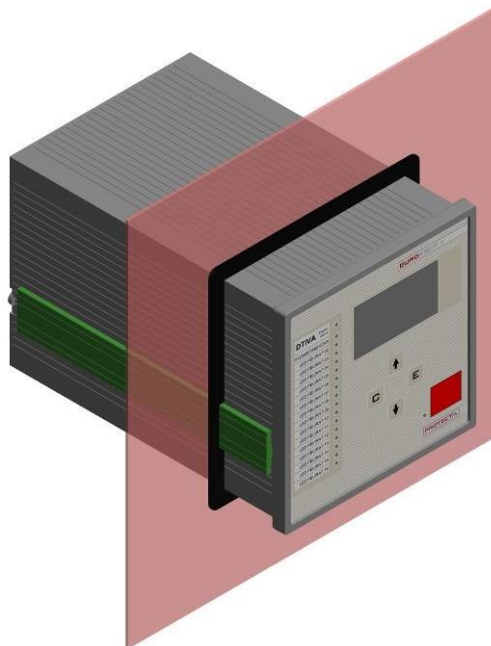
Dimensions for semi-flush mounting of 24 HP panel instrument case with 3D illustration
